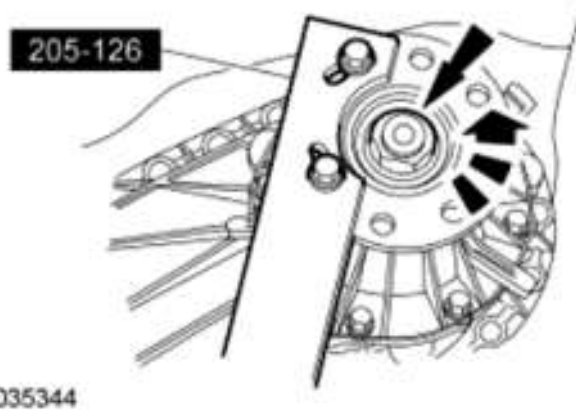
Removing Rear Output Flange Nut Using Drive Pinion Flange Holding Fixture
